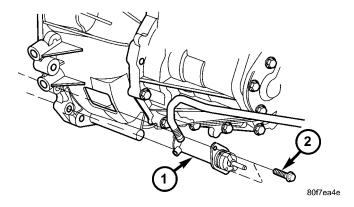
Clutch Slave Cylinder at Transaxle—1.6L Models
